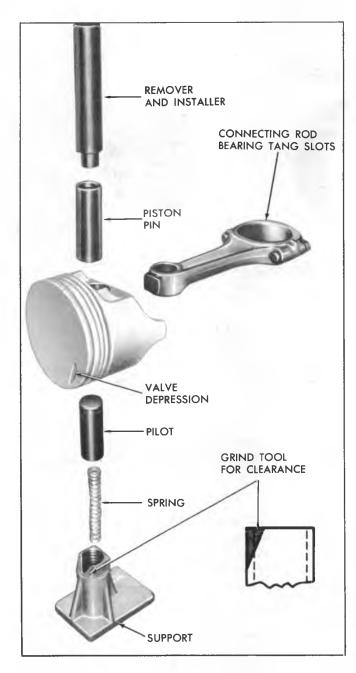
Piston Pin and Tool Layout ("Mark IV V8")
